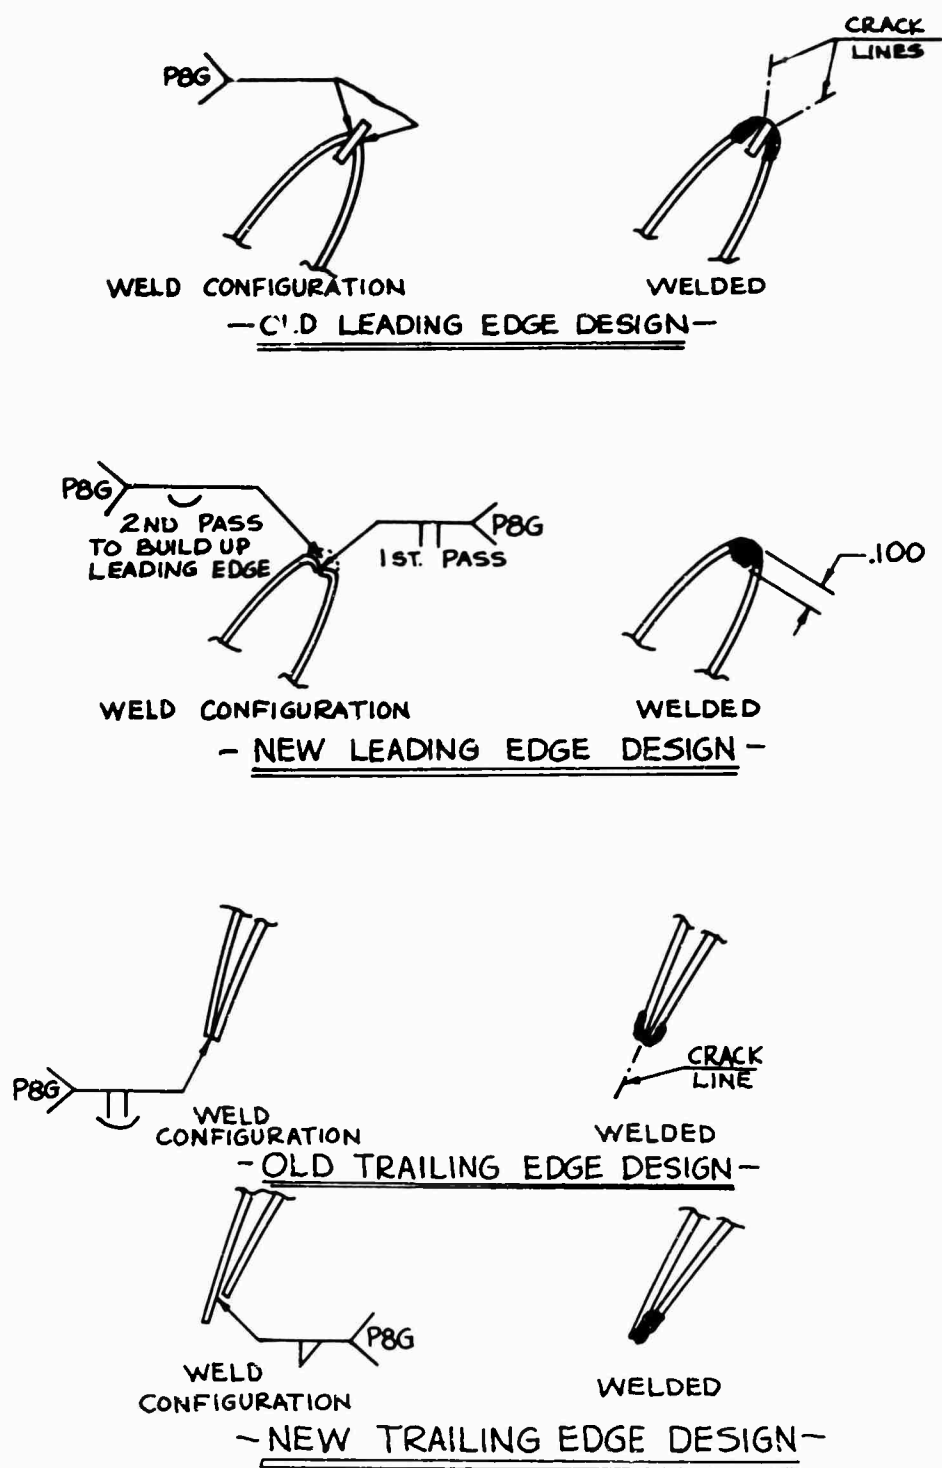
Lift Fan Inlet Circular Vane Leading And Trailing Edge Weld Design Change
